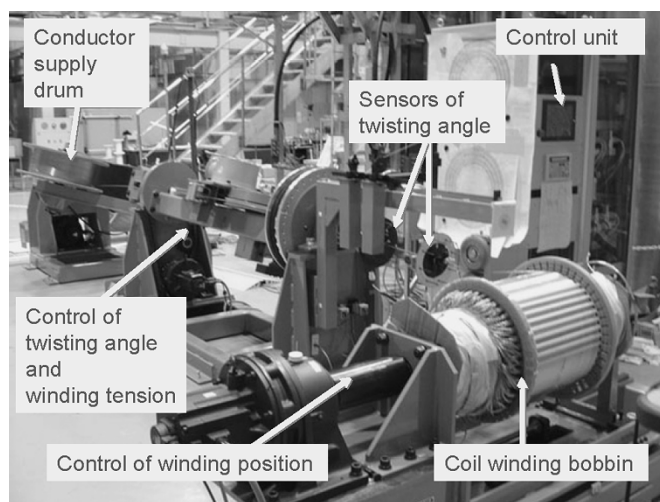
Winding procedure of the prototype coil by the developed twist winding machine.
